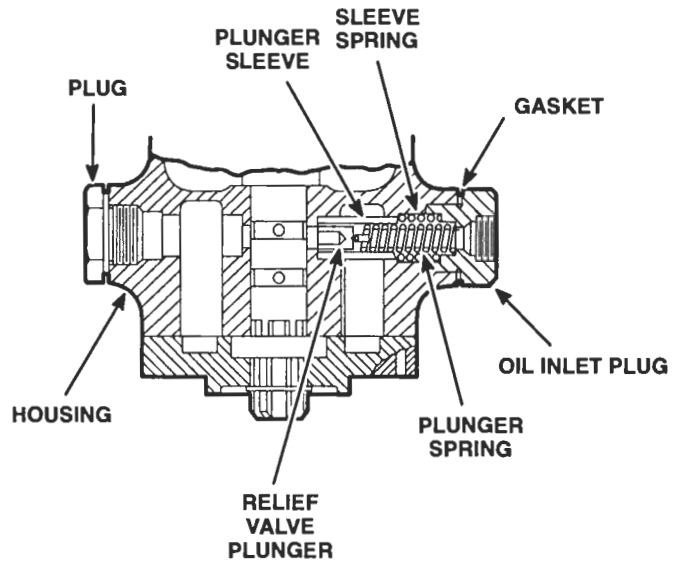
Location of Relief Valve Plunger, Plunger Sleeve, Springs, Oil Inlet Plug and Dummy Plug in Governor
